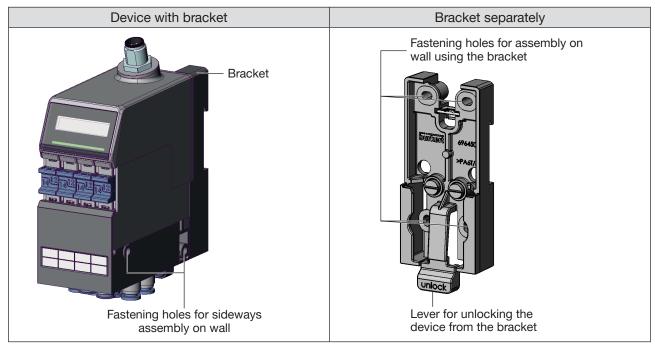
Assembly on wall for AirLINE Field Type 8653 field module
